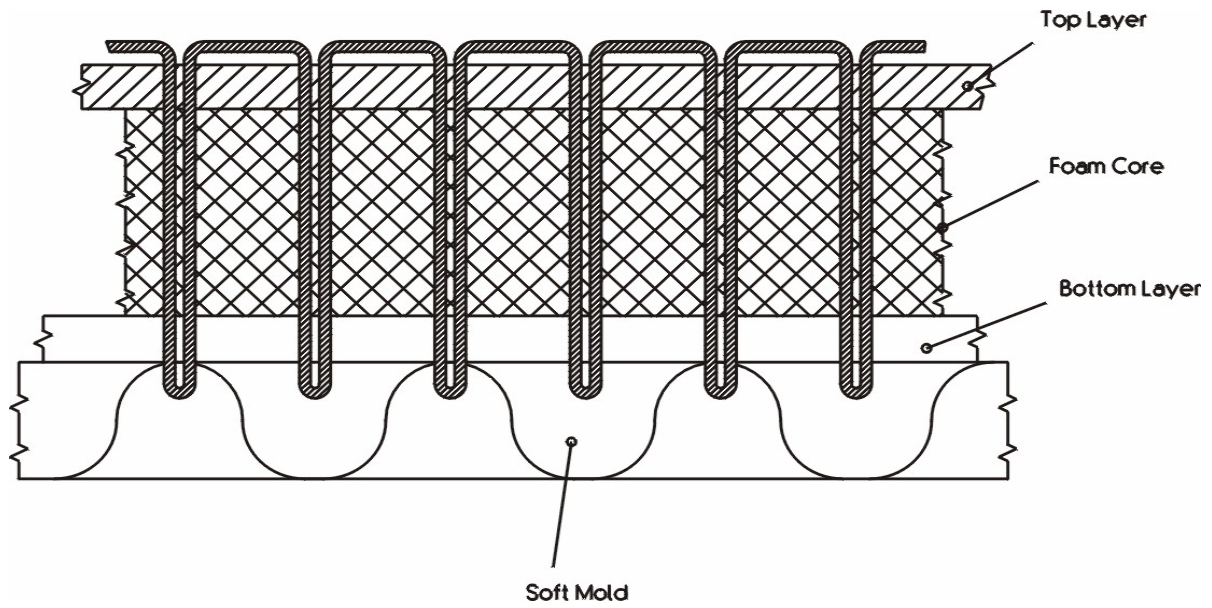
Scheme of a sandwich structure fixed by Tufting
